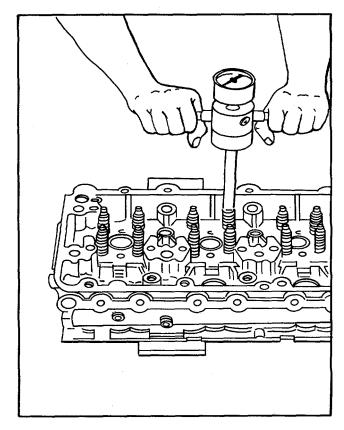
Checking Valve Opening Pressure with Gage J 25076-01
